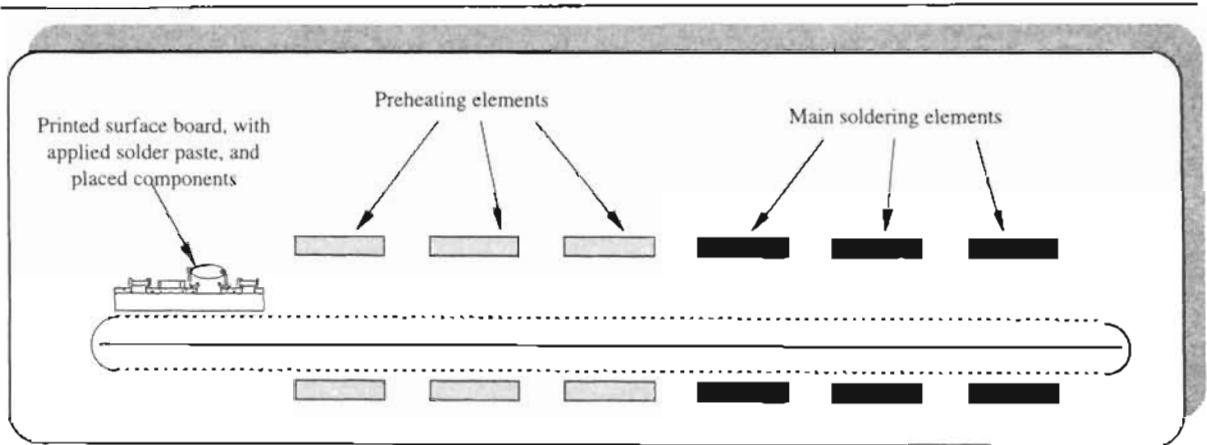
Heating elements in infra-red soldering machines are positioned above and below assemblies
